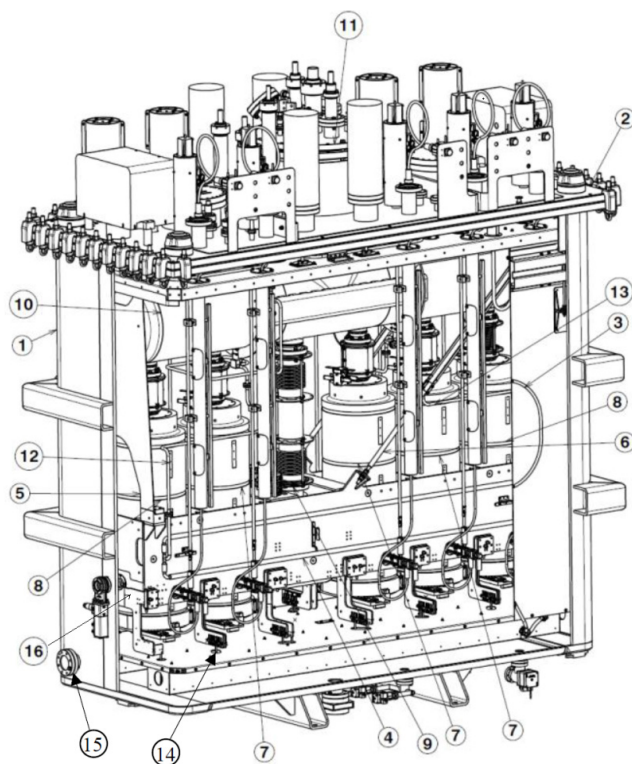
The complete HIE-ISOLDE high- β cryo-module: 1 Vacuum vessel lower box, 2 Vacuum vessel top plate assembly, 3 Thermal shield lower box, 4 Support frame, 5 Suspension end plate, 6 Tie-rod, 7 Inboard cavity, 8 Outboard cavity, 9 Down tube to solenoid, 10 Helium vessel, 11 Chimney assembly, 12 Support frame cooling supply, 13 Support frame cooling return, 14 Mathilde targets, 15 Mathilde viewport, 16 Omega plate.
